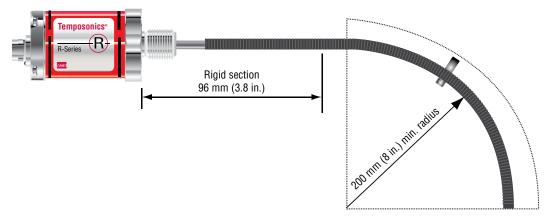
Installation example showing minimum bend radius for curvilinear measurements.
